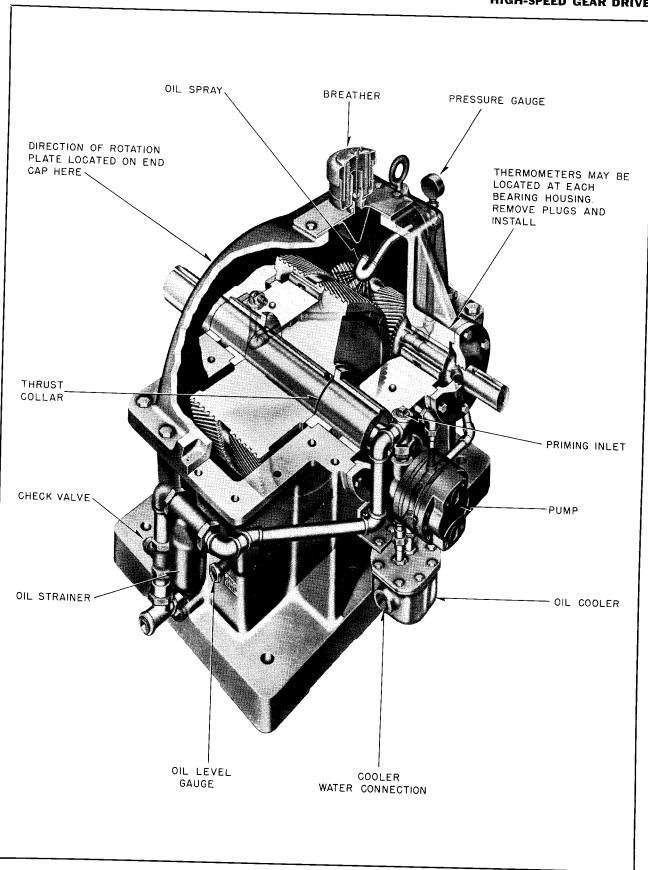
Cutaway View of Type SU High-Speed Gear Drive
